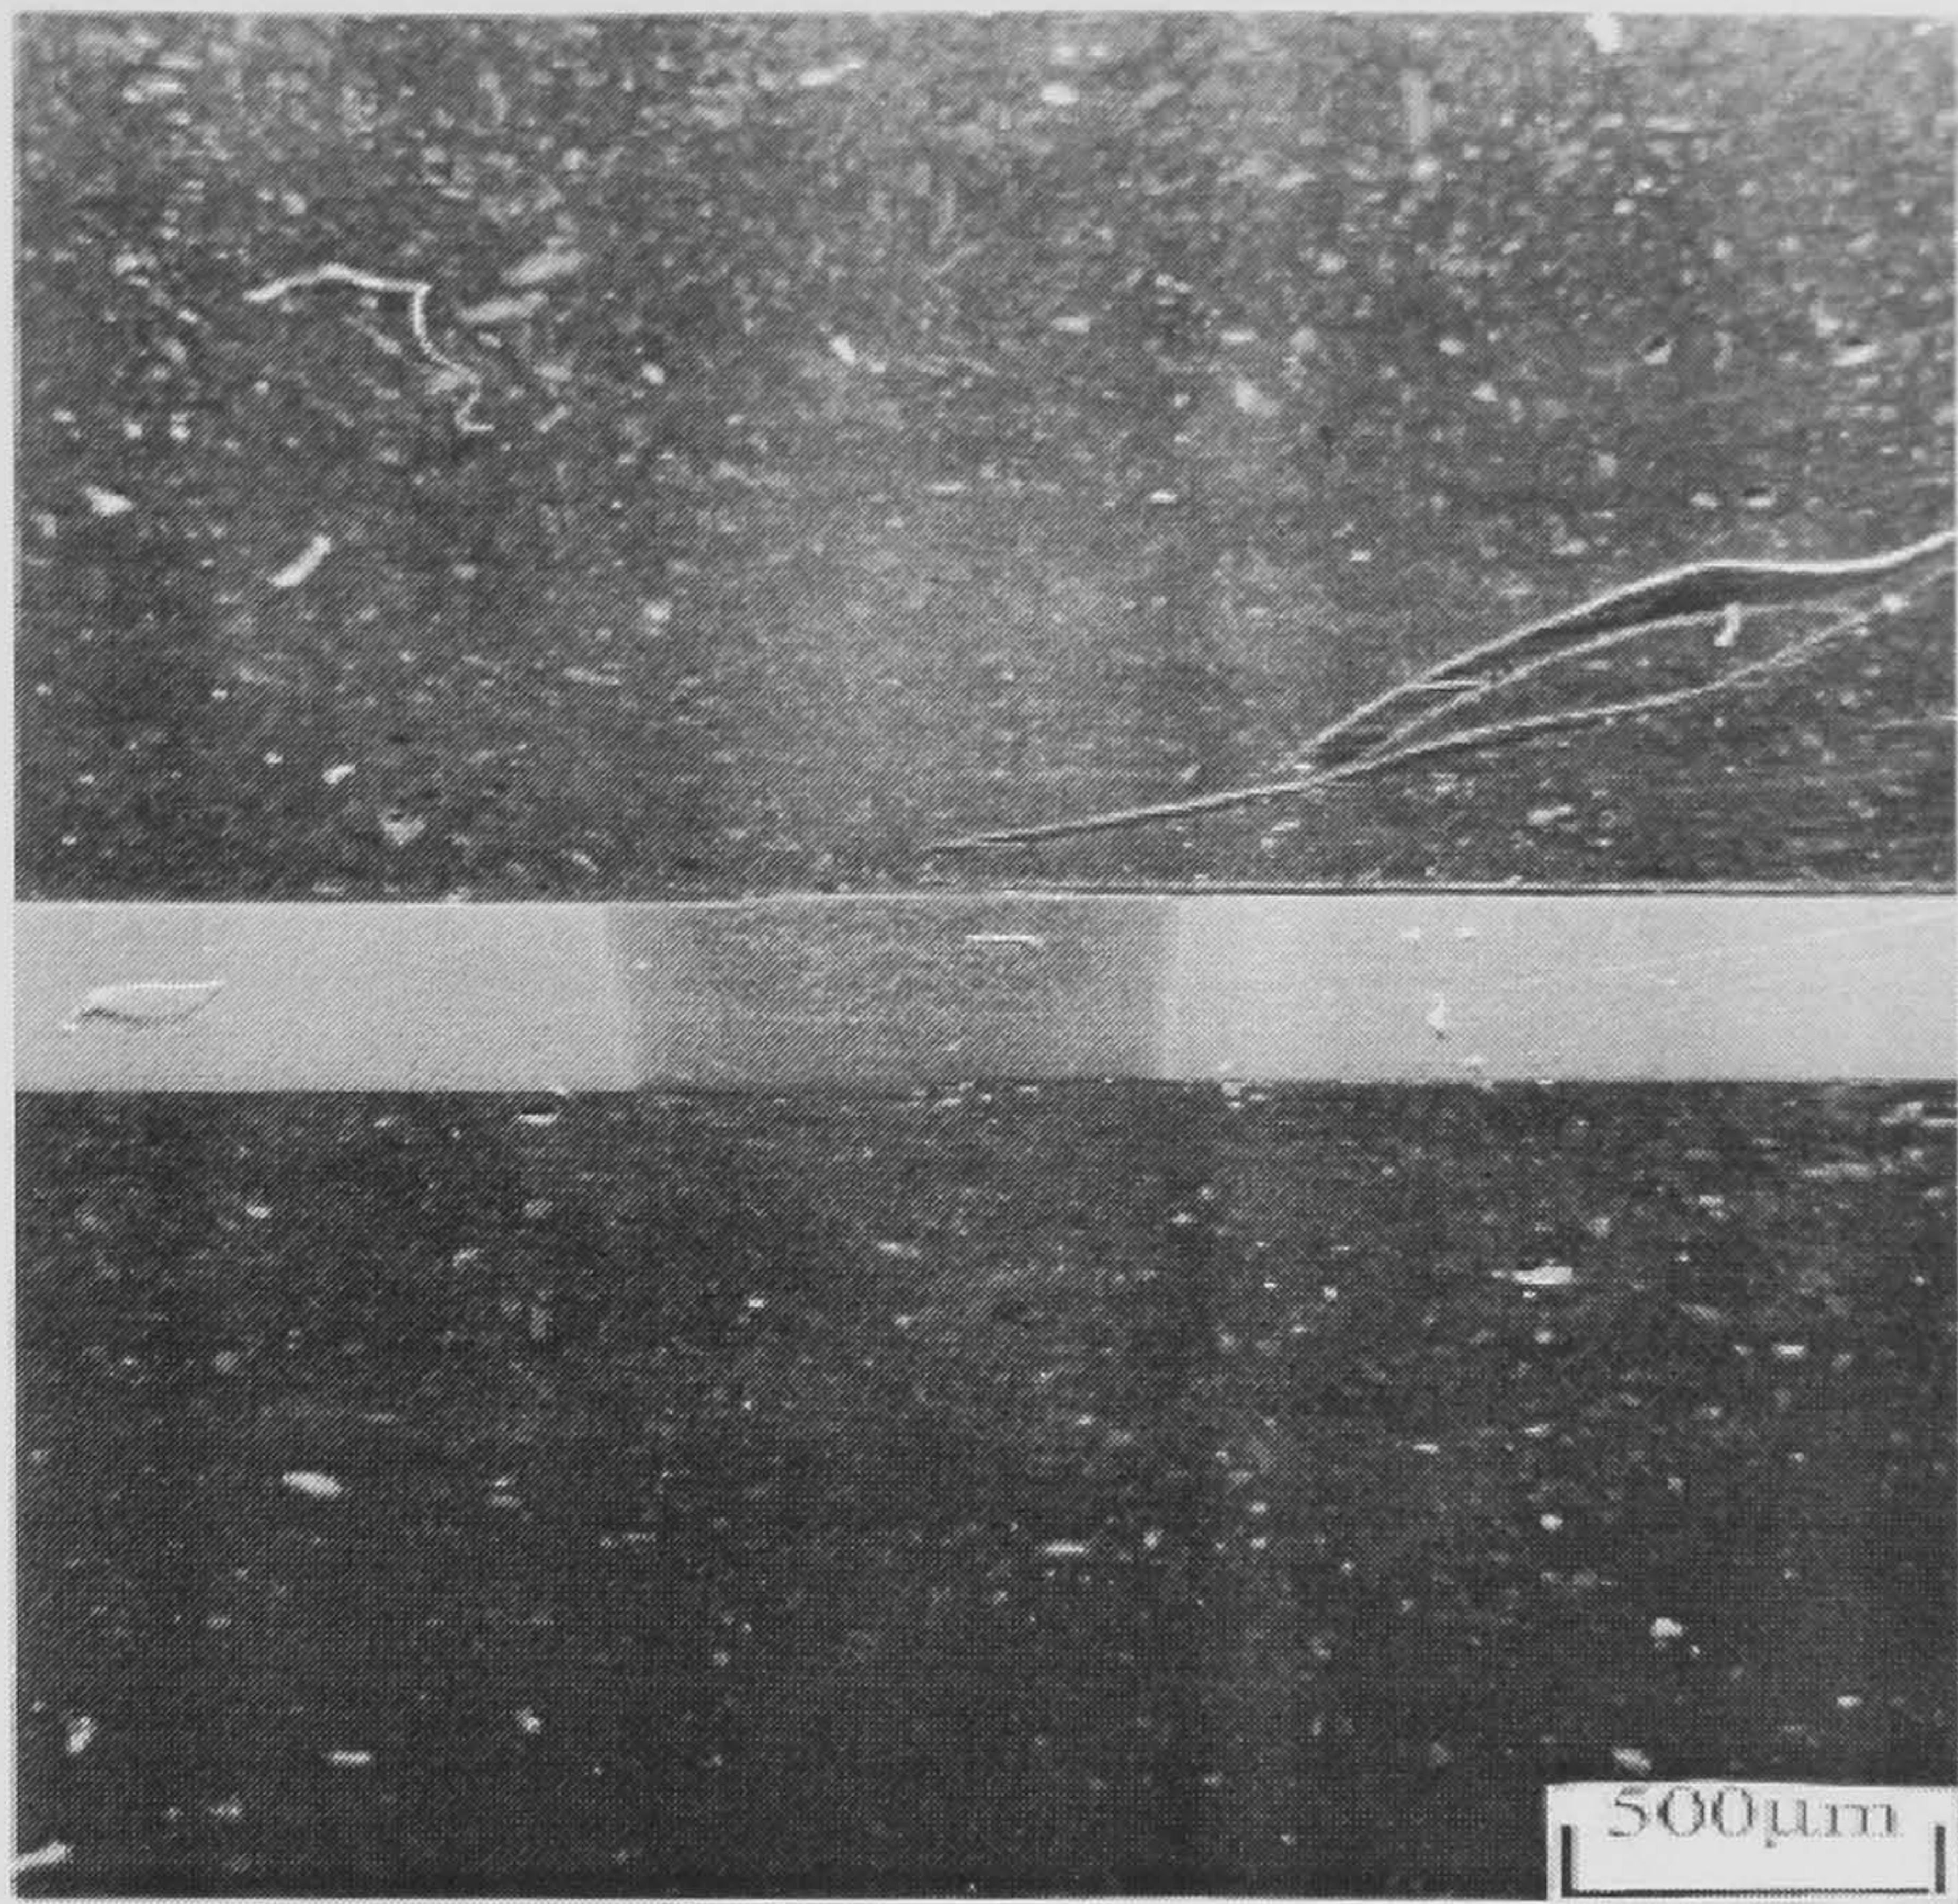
Micrograph of the weld width for diode laser weld at a welding velocity of 9 mm/s
